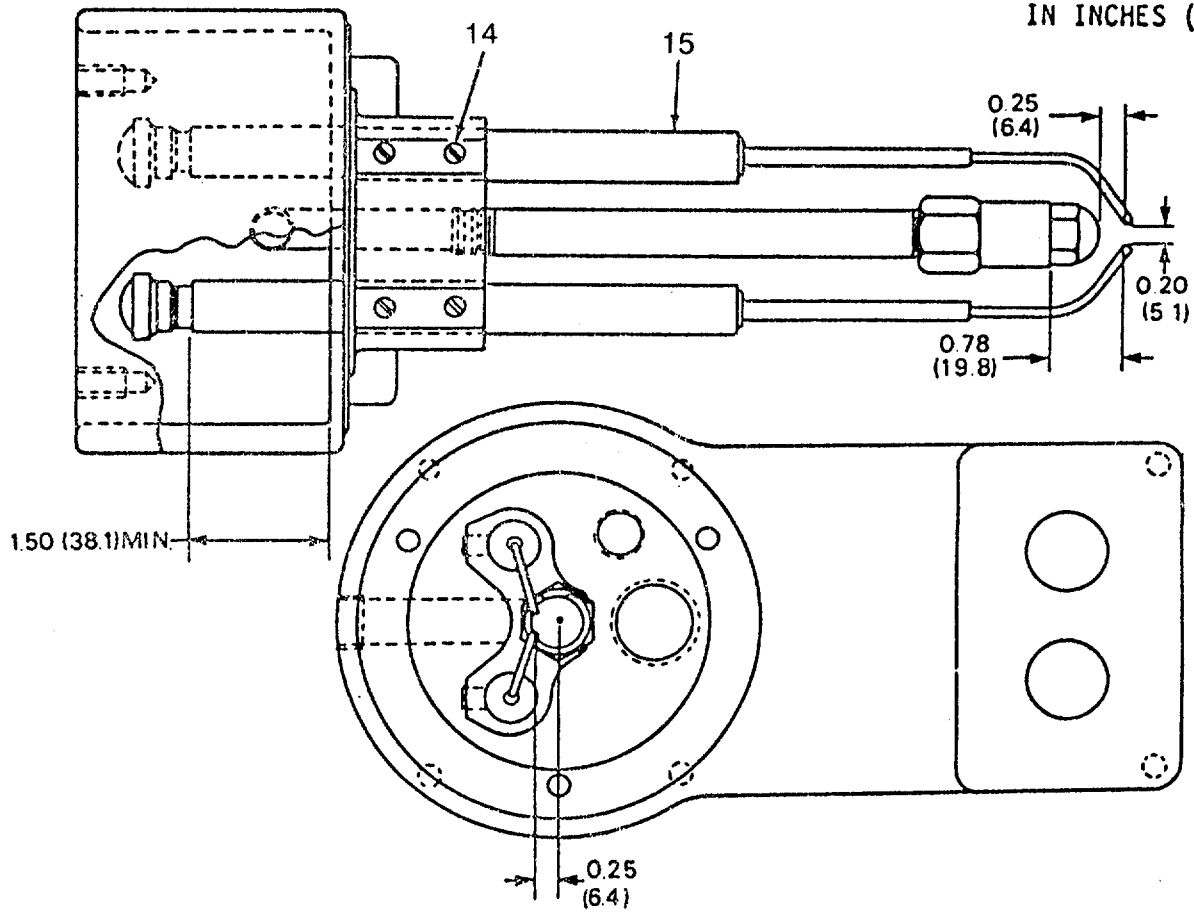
Ignition Cables, Sight Eye, Nozzle, Fuel Piping and Electrodes (Sheet 2)
